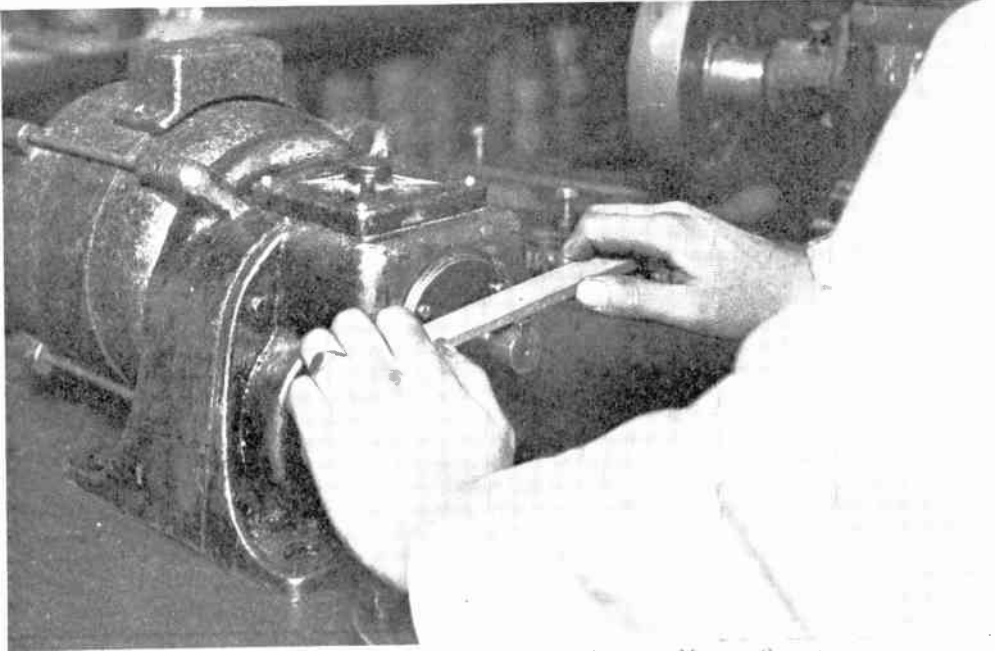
FITTING A COUPLING TO A GEARED MOTOR SHAFT.
